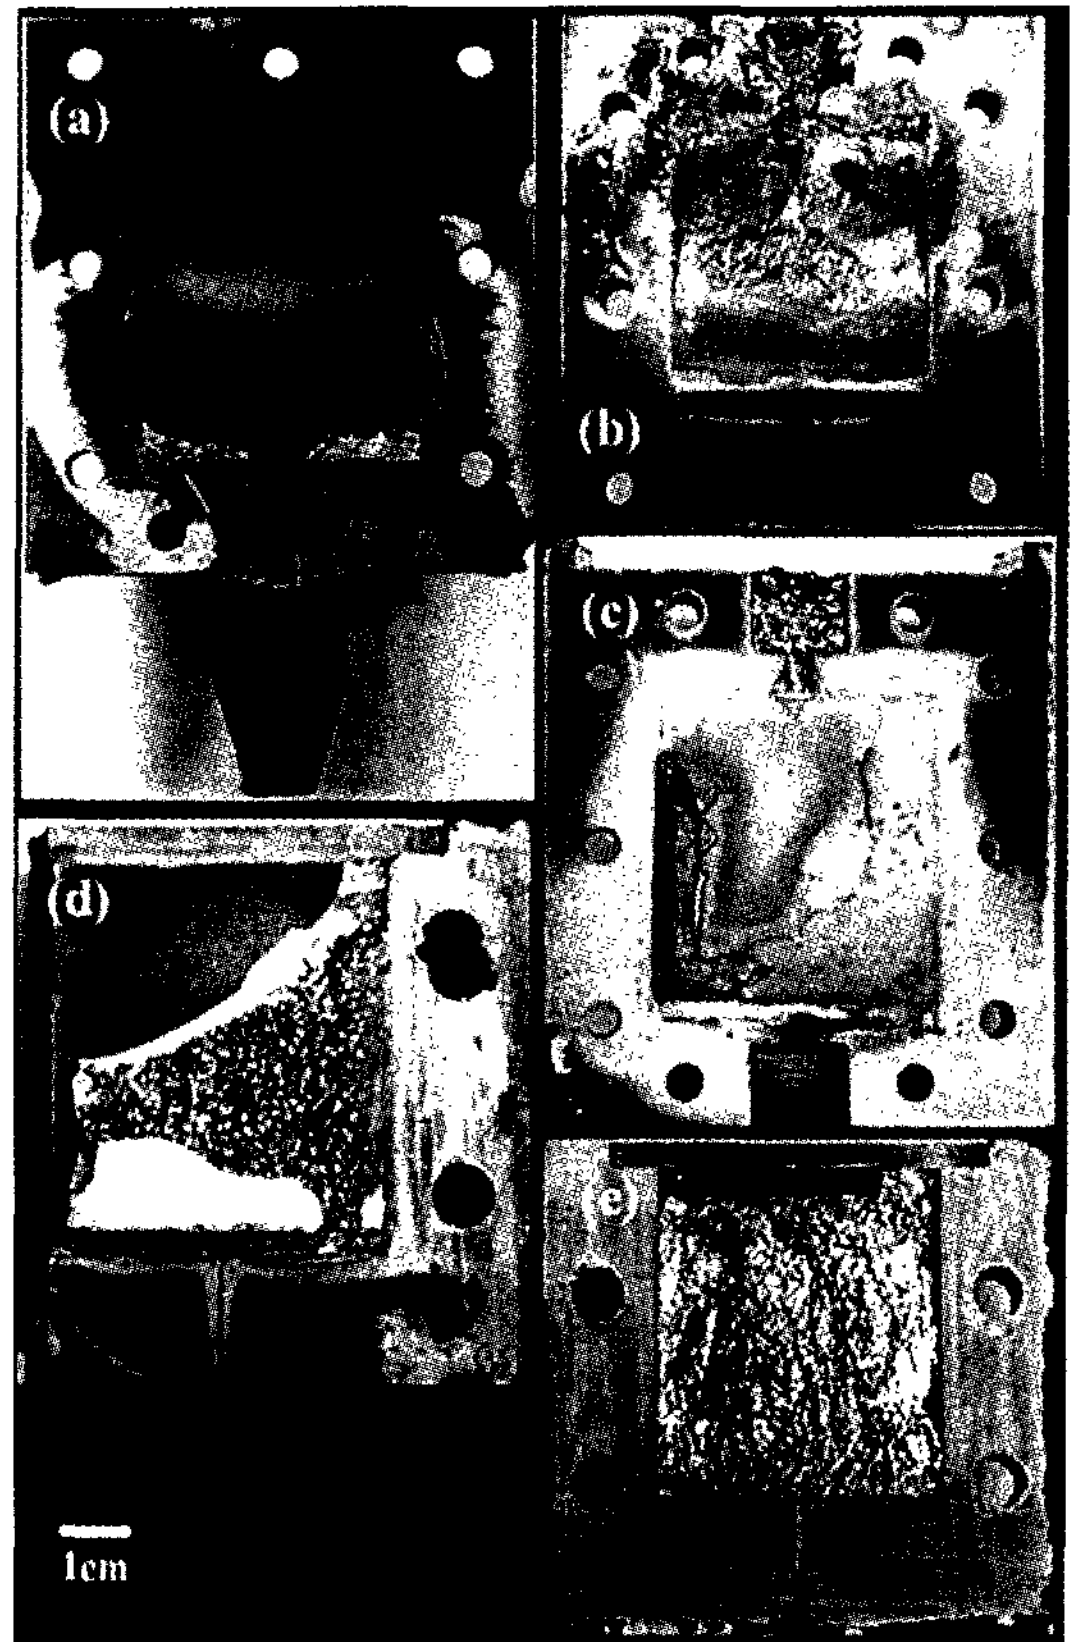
Mold filling configuration of each experimental condition. : (a) bottom to top (No coating), (b) top to bottom (BN coating), (c) top to bottom (BN insert), (d) top to bottom (modified crucible, BN insert) and (e) top to bottom (modified crucible, BN coating)
